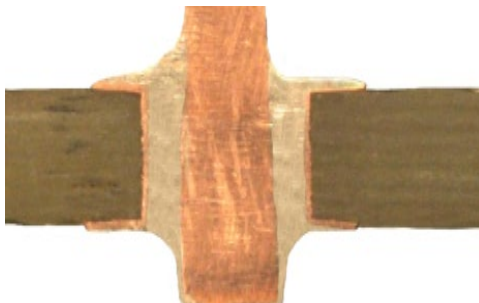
Double-Sided CCA with No Hole Support (cross-section)
